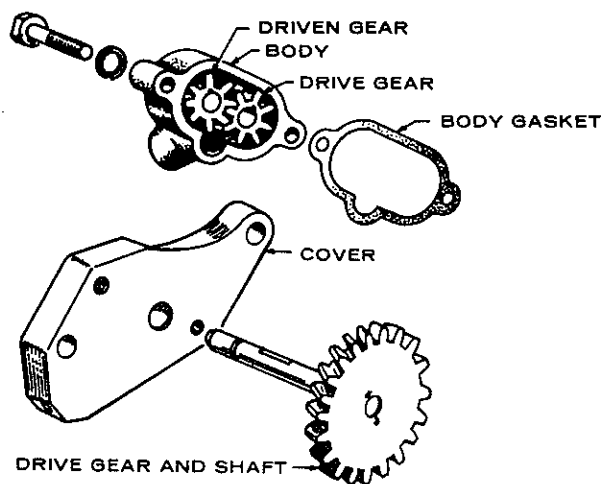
OIL PUMP ASSEMBLY AND GASKET
